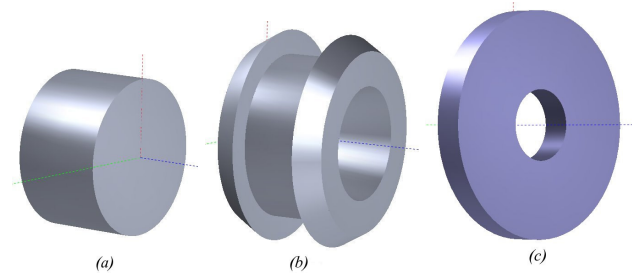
The balancing unit (a), the hub (b), and the grinding wheel (c).
